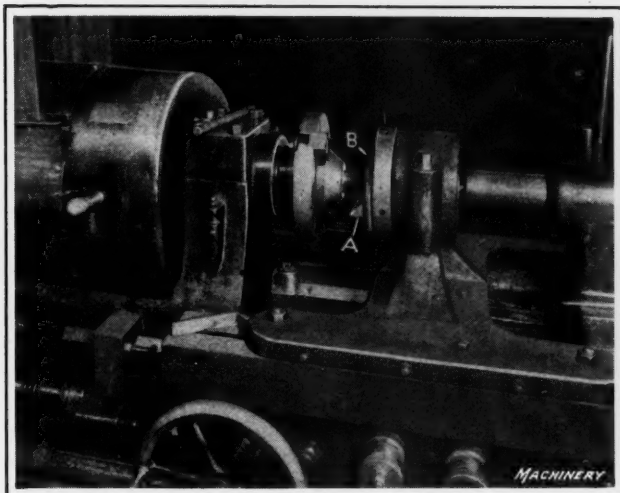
Lathe equipped for finish-turning the Surfaces machined in the Lathe shown in Fig. 5
